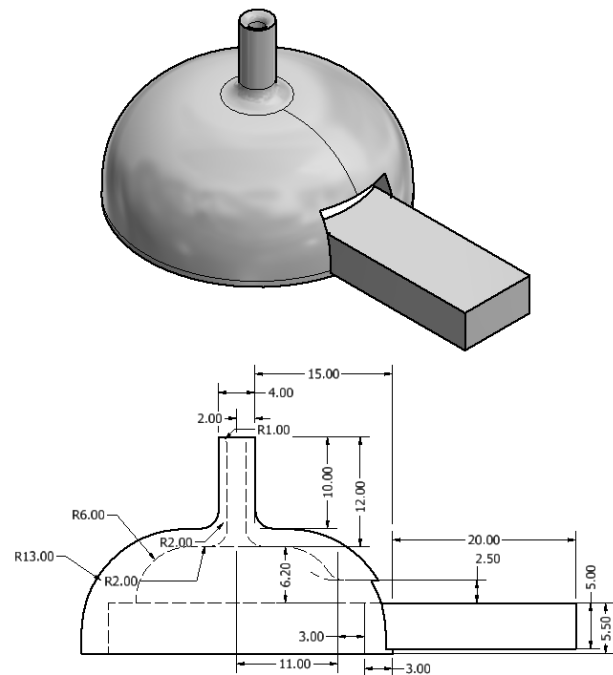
Modified TDS cassette top piece to fit the sensor and readout board.
